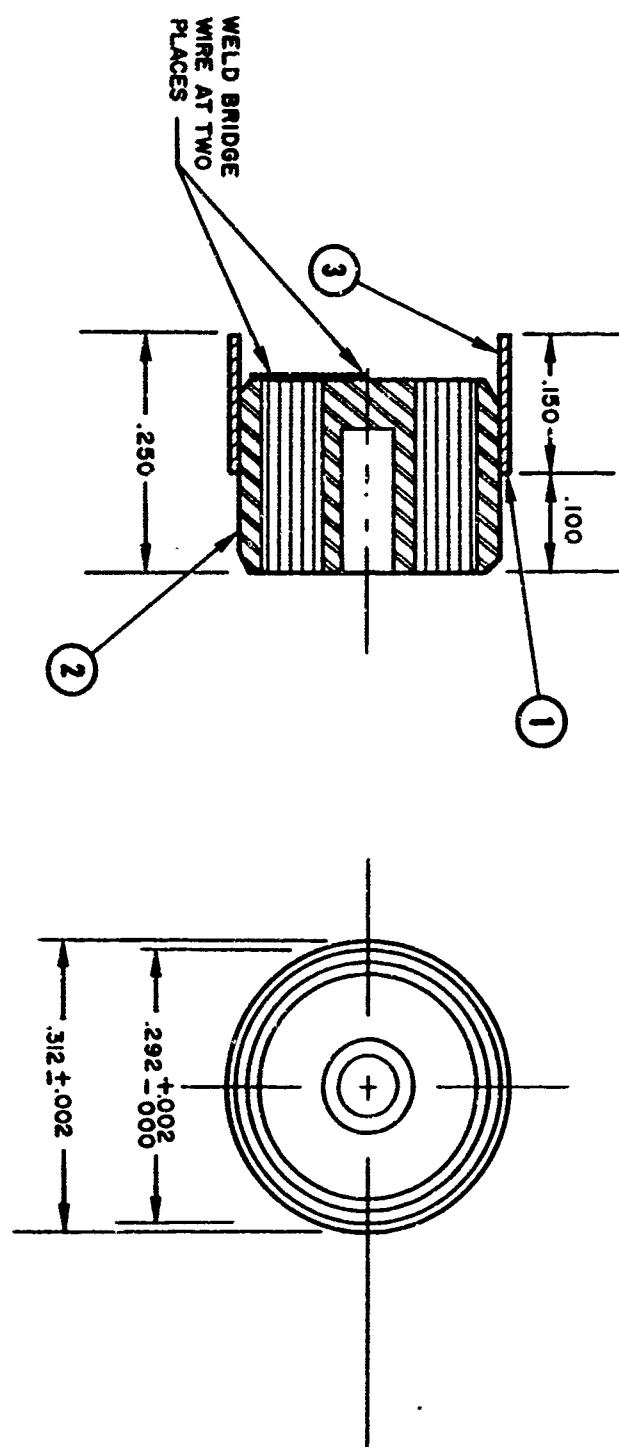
Drawing P-1003, Glass Header Sleeve Assembly 3594.
